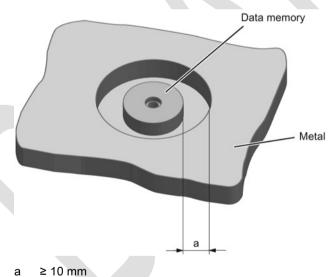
Mounting of the RF330T in metal with 10 mm clearance
